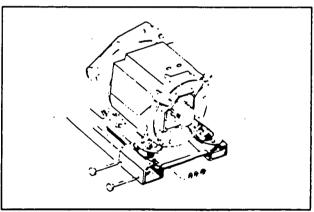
Removal of Mounting Rail Fasteners and Stator Bolts
